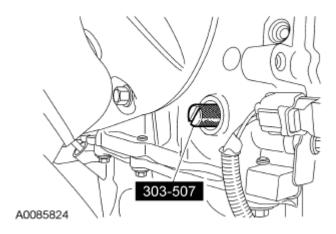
Locating Crankshaft Pulley Bolt Courtesy of FORD MOTOR CO.
